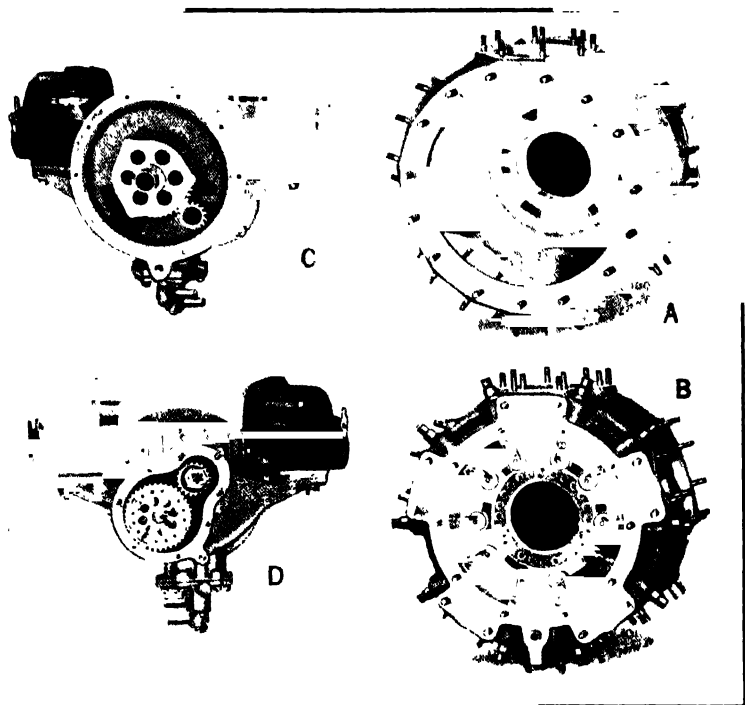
Views Showing LeBlond Crankcase Construction. A—Crankcase with Cylinders Removed. B—View of Crankcase with Cam Follower Rolls and Plunger in Place. C—View of Accessory Case Showing Three Lobed Cam and Magnetos. D—Rear View of Crankcase.
